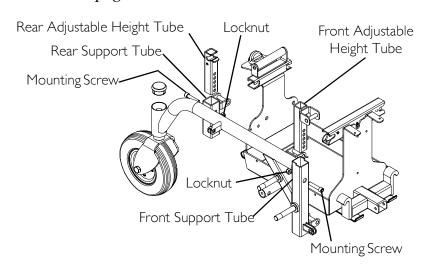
Removing the Existing Seat Frame Mounting Hardware - M71 and M91 Wheelchairs
